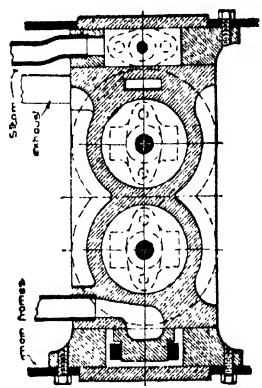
Model Inside Cylinders with Outside Valve Gear.
